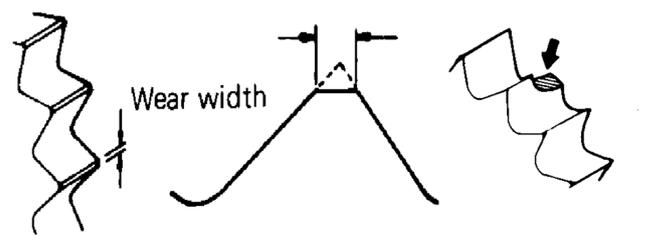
The maximum wear width as shown above should not exceed the dimensions shown in the table below.
